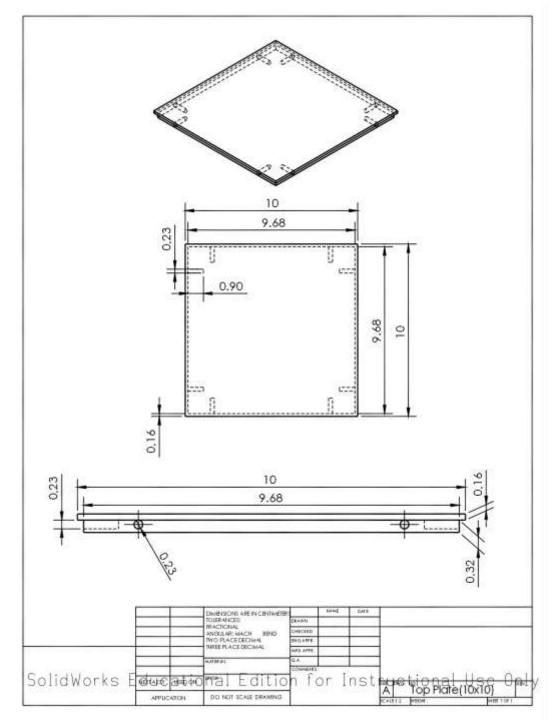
Mechanical drawing of top plate of HAXDT structure with dimensions in centimeters. The detector housing (Fig. A5) and GPS antenna attaches to this plate. Note mounting locations have not yet been determined.
